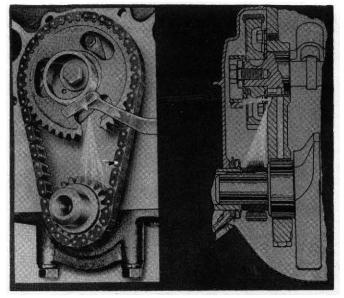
Lubrication of timing chain and fuel pump eccentric
